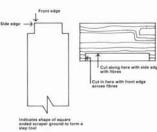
With the step tool, remove the excess creating a right angle cut 5mm 3/16".
